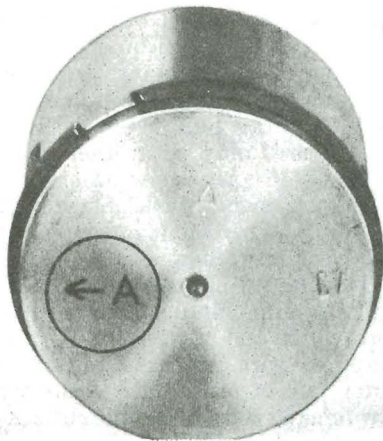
Install piston on connecting rod with "A" arrow on piston crown pointing toward exhaust port in cylinder.
